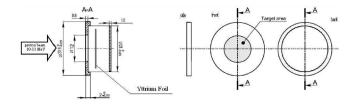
Solid target "coin" design — aluminum 2-pieces holder and yttrium foil inside.
